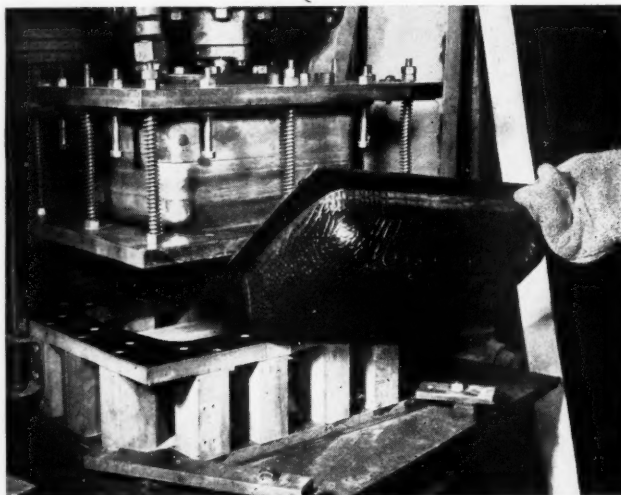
Formed Royalite Part Being Removed from Plug and Ring Mold
